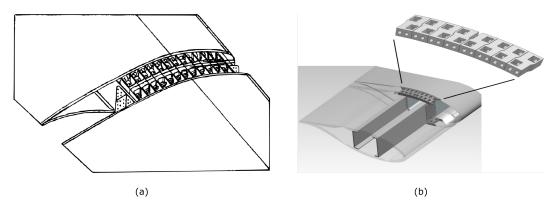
Prototype segmented blades using inserts. a) blade joint developed during the UpWind project [54]. b) Blade joint with alternating long and short bolts [48].
